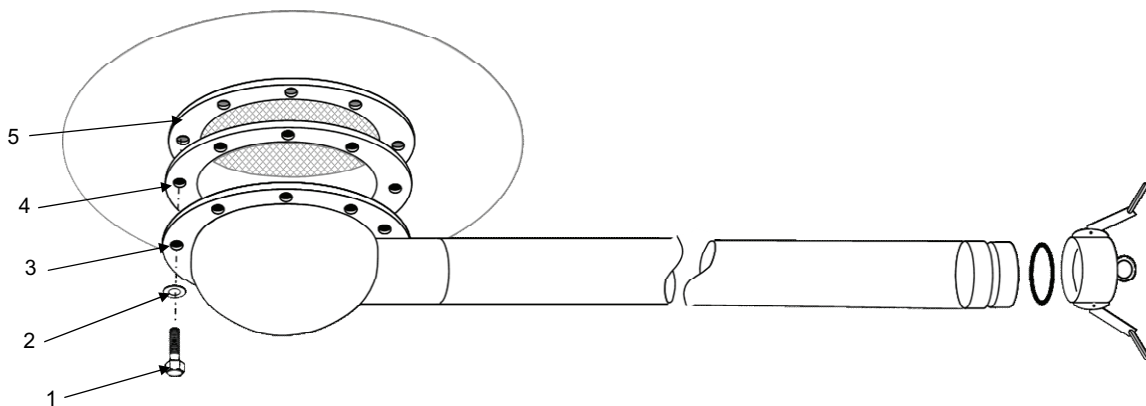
Tank Drain Hose Assembly, Bowl x Cam.
